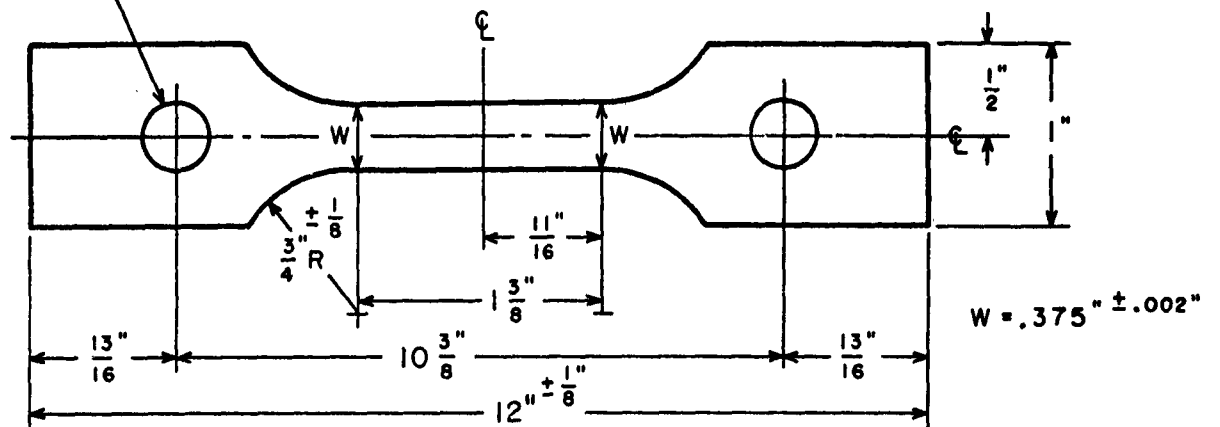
Dimensions of the Strip Stress-Corrosion Test Specimens.
